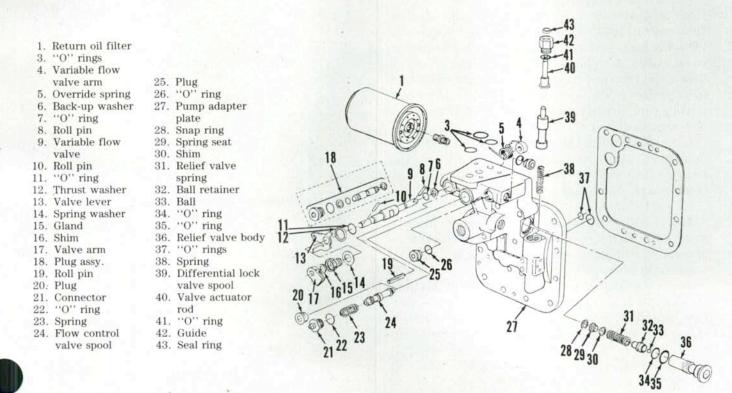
Exploded view of hydraulic pump adapter plate and valve assemblies. Adapter plate (27) is serviced as a complete plate and valve assembly only; all other parts are available separately. Plug assembly (18) is used in place of variable flow valve (9) on tractors not equipped with hydraulic lift. Differential lock valve (39) is not used on Model TW-35.
